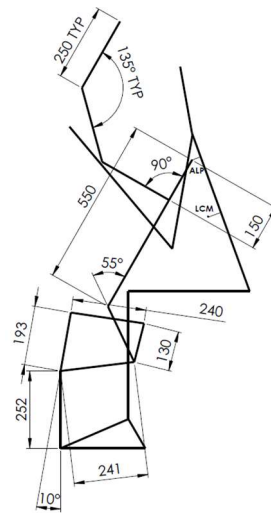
Geometry and Dimensions of Four Bar Linkage Mechanism
